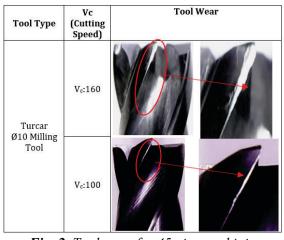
Tool wear for 45min. machining of Ø10 Turcar
